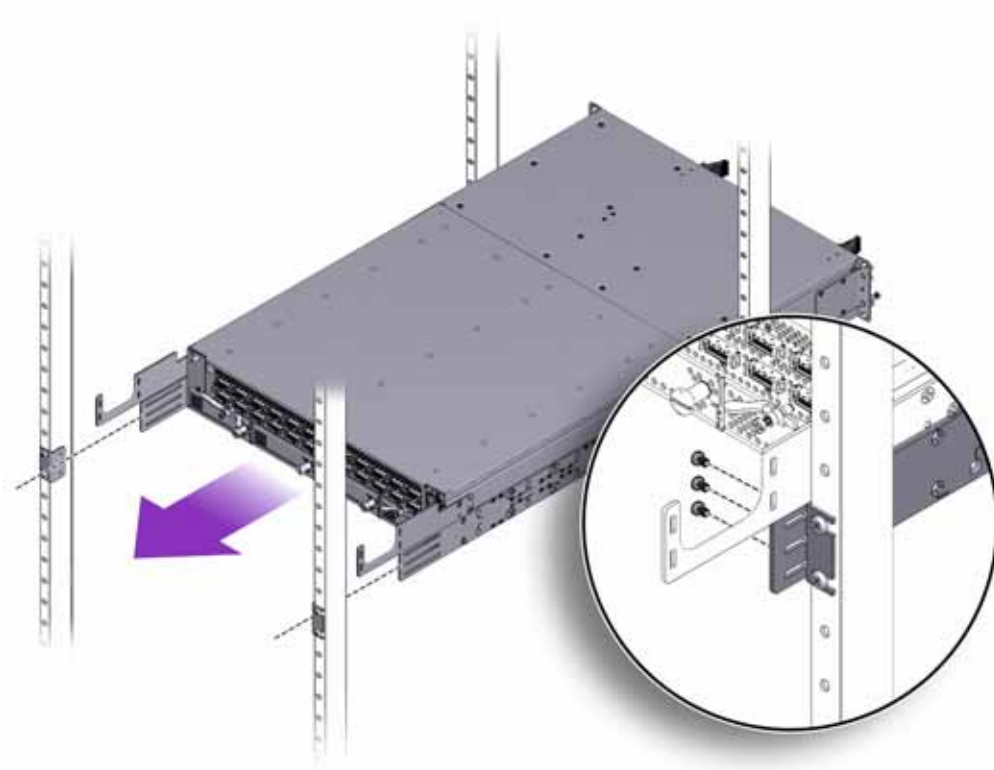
Attaching the Rack Depth Measures to the Angle Brackets
